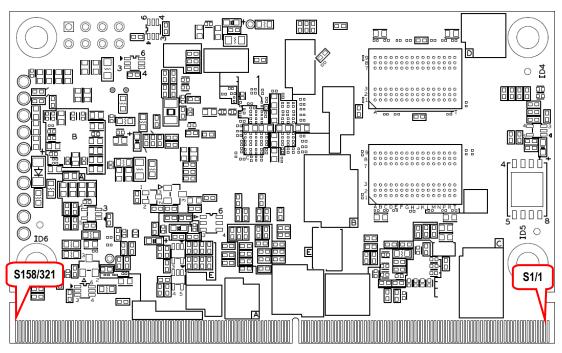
EACOM Board Pin Numbering, Bottom Side
